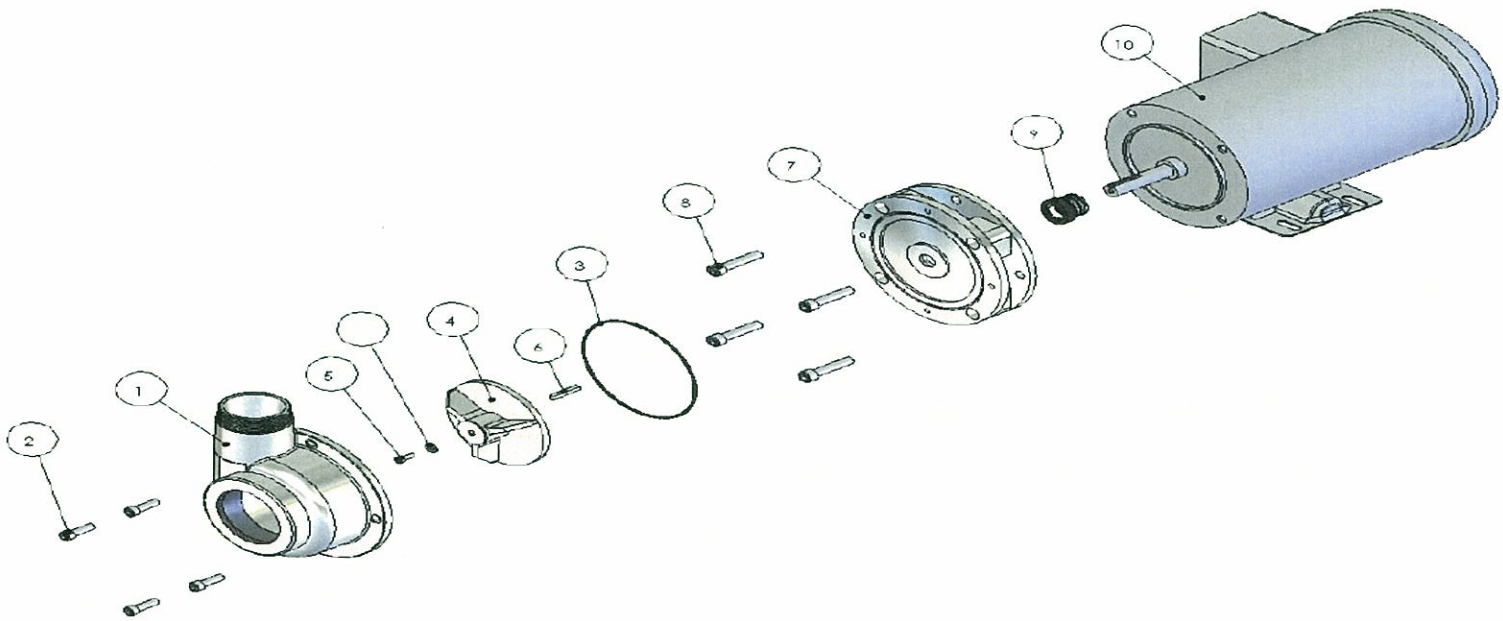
KW DIRECT DRIVE PUMP EXPLODED VIEW
